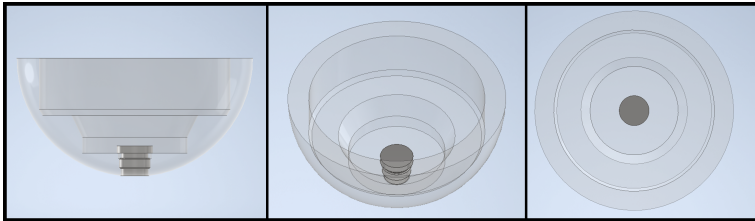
Different angle on the bottom half shell: Side view (left), beveled top view (center), top view (right).
